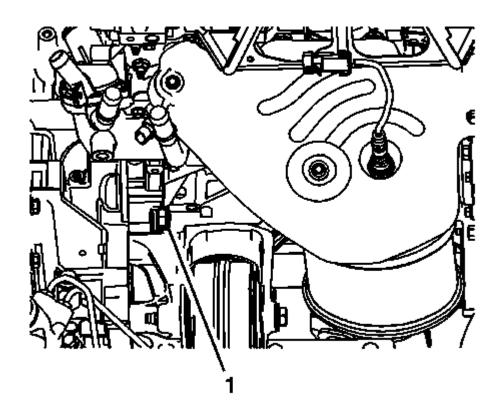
Drain Plug & Seal Ring Courtesy of GENERAL MOTORS COMPANY
